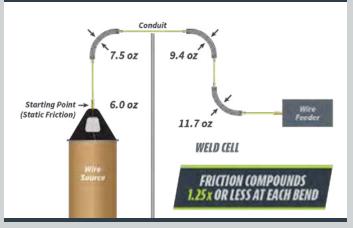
FIGHT WIRE FRICTION WITH WIRE WIZARD® CONDUIT & GUIDE MODULES!
